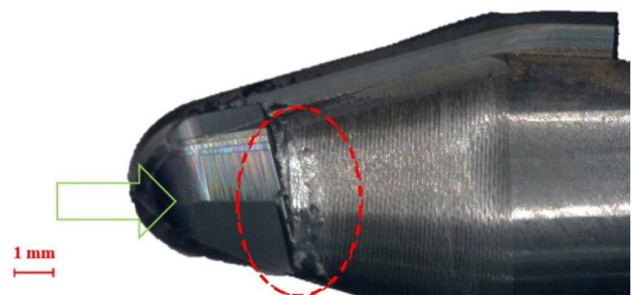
Grinded Off Part of Body (green) and Repeated Rubbing of DP Tool Body (red).
